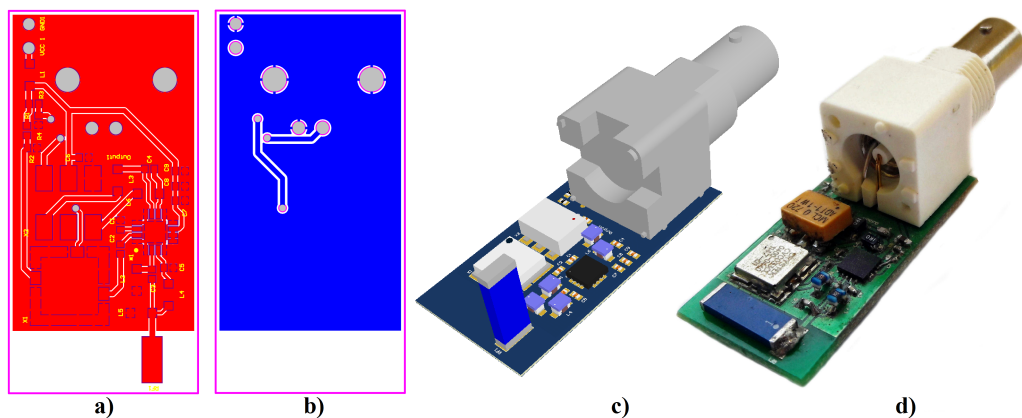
PCB of the designed OOK receiver: a) top routing layer; b) bottom routing layer; c) 3D model d) physical device
